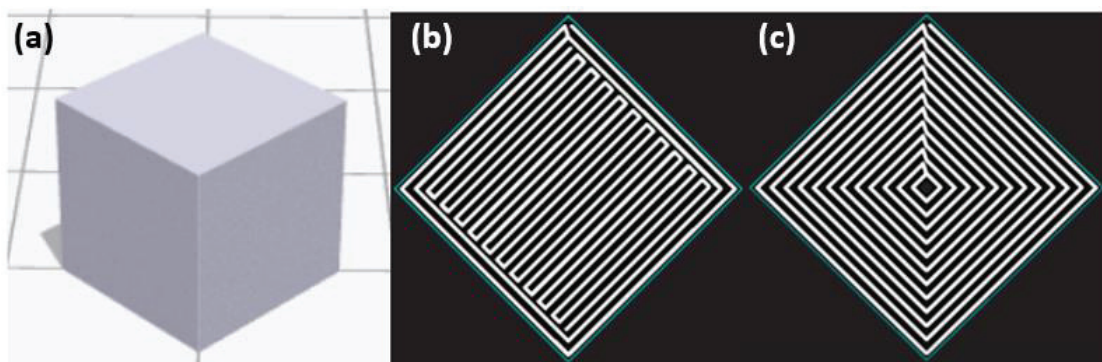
The view of each dimensions are 10 mm in length (CUBE10) compression test specimens (a) Perspective view, (b) [0/90] lay-up inside view, (c) Concentric lay-up inside view
